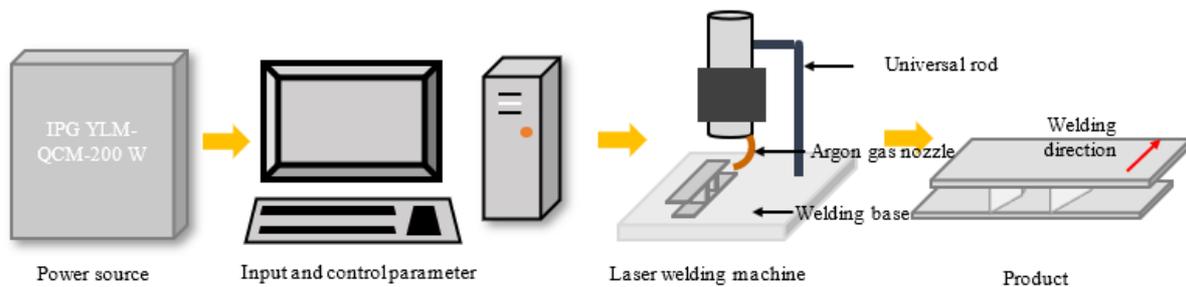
Schematic diagram of laser welding process on web-core sandwich structure
